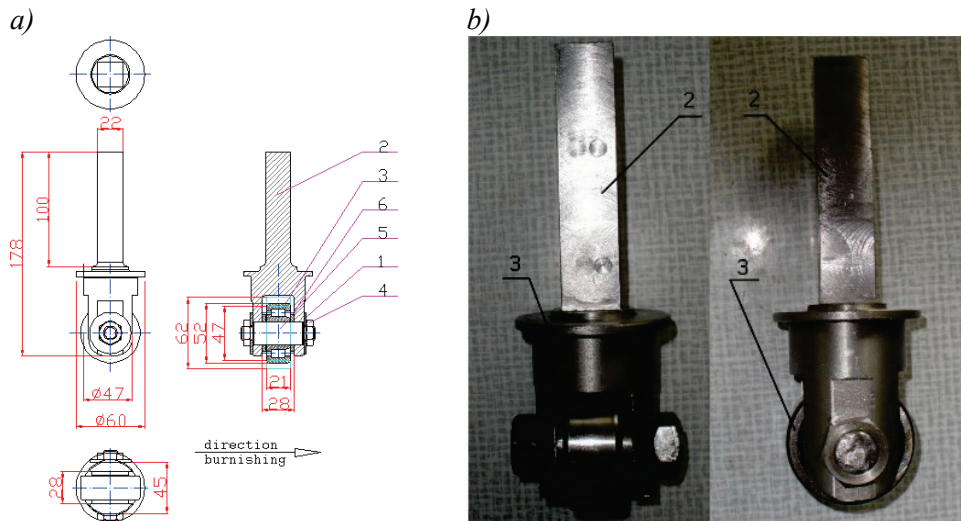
Burnisher NK-01, a) schematic diagram, b) view of burnishing tool: 1 – washer; 2 – grip; 3 – burnishing element with a diameter of Ø52 mm; 4 – M12 nut; 5 – fitted pin with a diameter of Ø20 mm; 6 – spacers [4]
